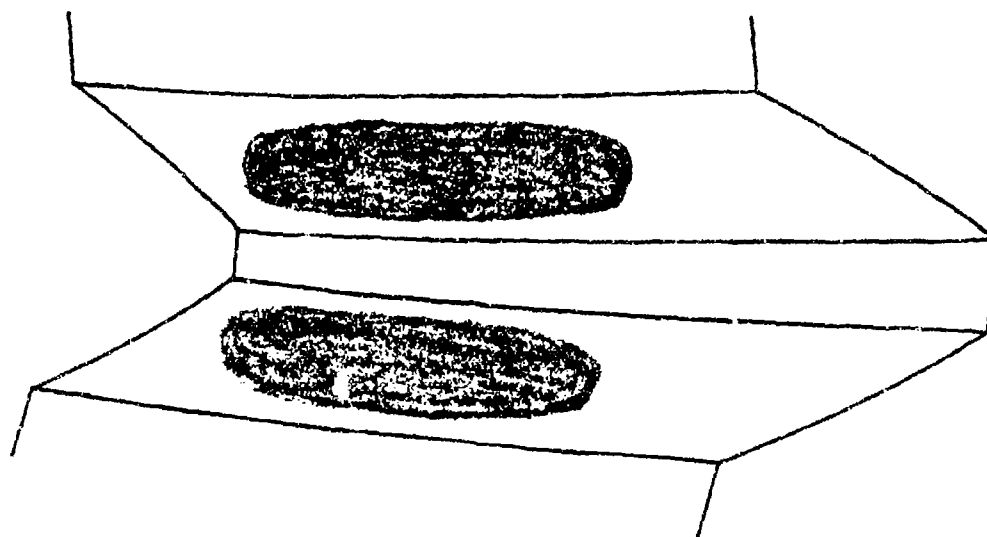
SPIRAL BEVEL GEAR CENTRAL TOE BEARING PATTERN
